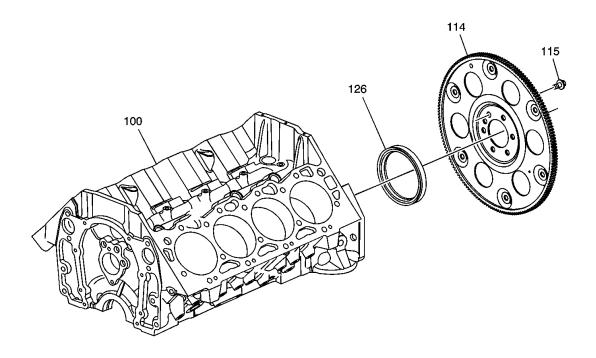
Engine Flywheel Disassembled View Courtesy of GENERAL MOTORS CORP.
